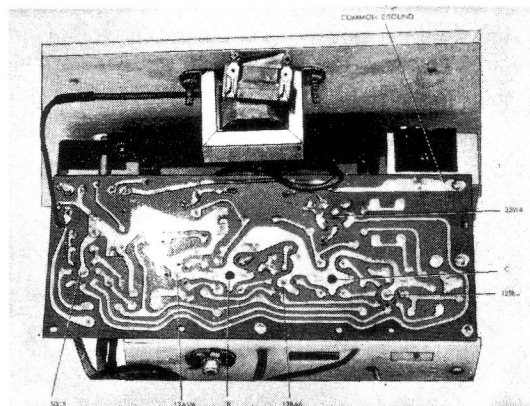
Bottom View of Chassis. Location of tubes and alignment points shown.
